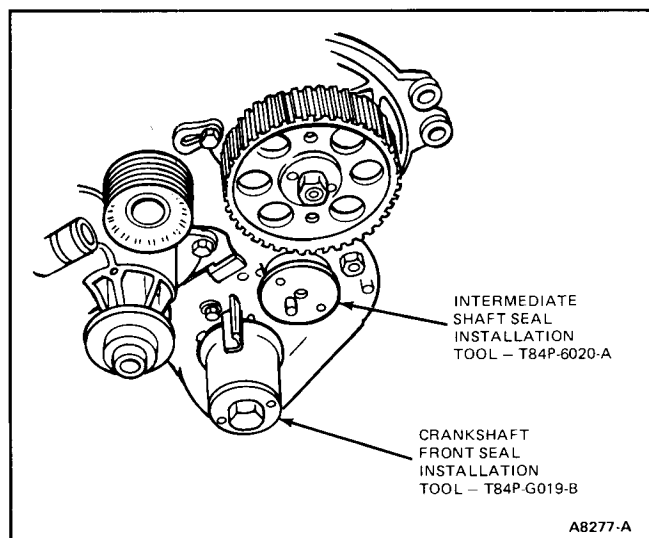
Front Crankshaft and Intermediate Shaft Installation Tools—Shown Installed
